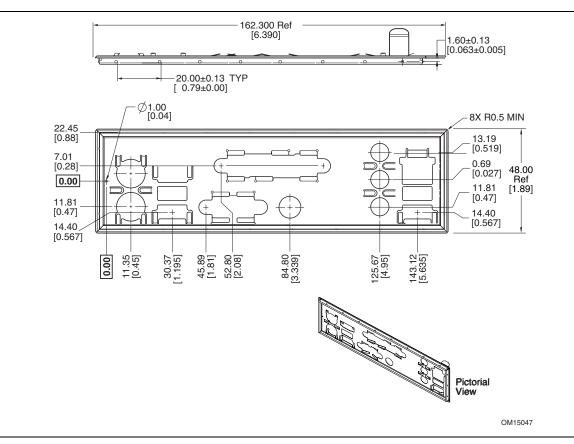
I/O Shield Dimensions for Boards with a 2-Channel Audio Subsystem
